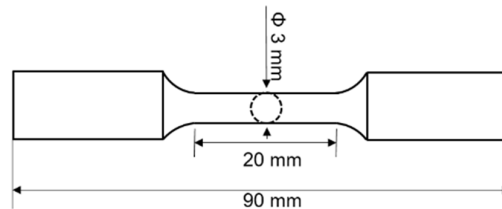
Geometry of specimens for fatigue and corrosion fatigue tests.
